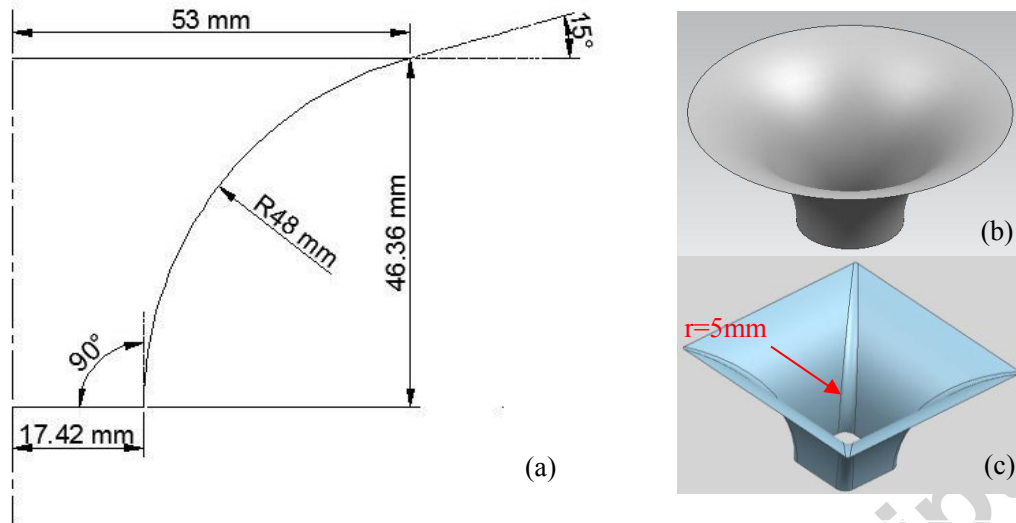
Geometry of test parts: (a) cross-section of the designed parts; (b) the cone part; (c) the pyramid part
